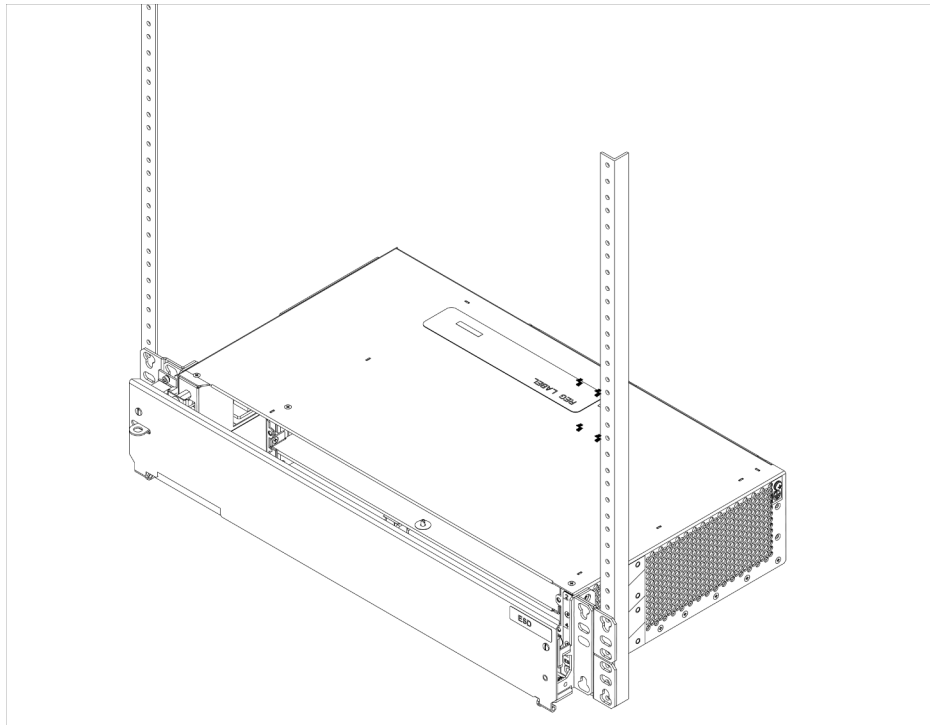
BTI 7060 19-inch ANSI rack, mid-mount position with no cover
